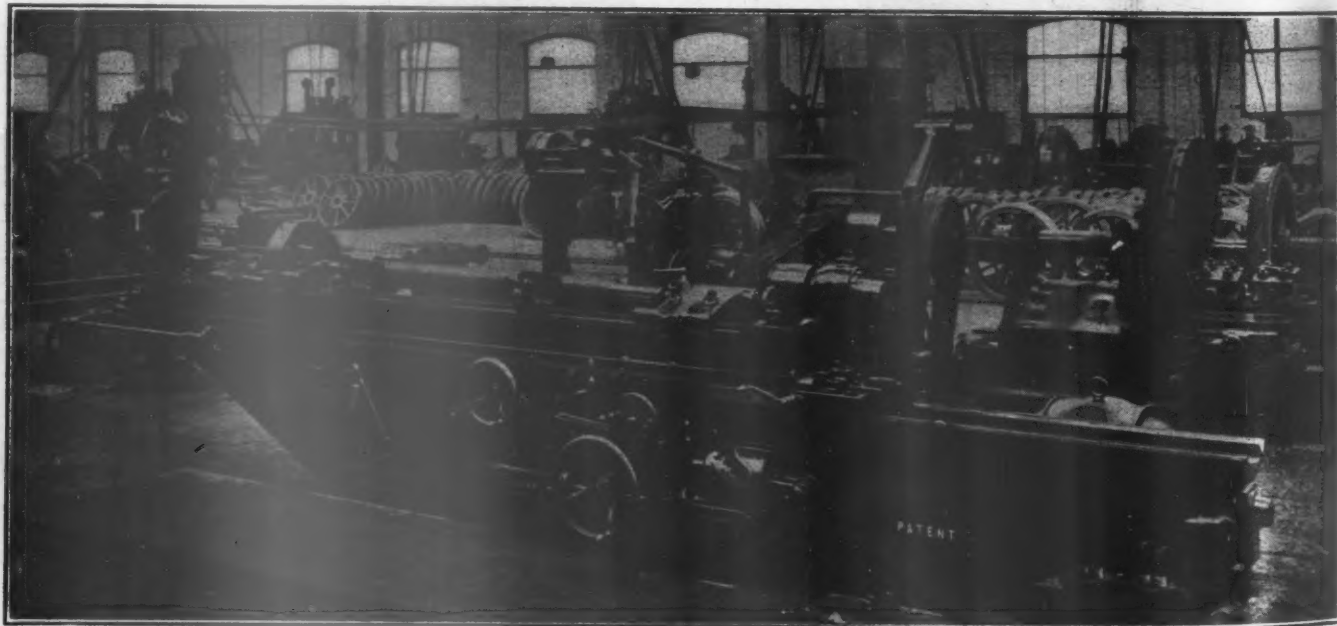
Grinding Car Axle Journals on a 16-in. by 96-in. Churchill Plain Grinder in a Belgian Car Shop
